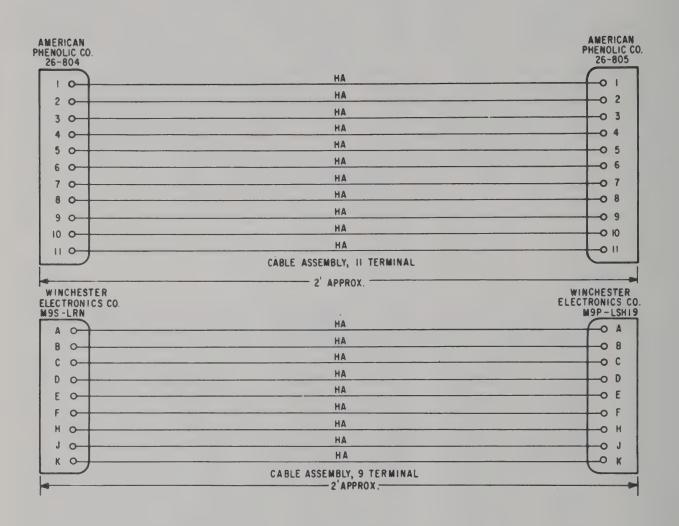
Typical Cable Assembly (9 and 11 Terminal)
